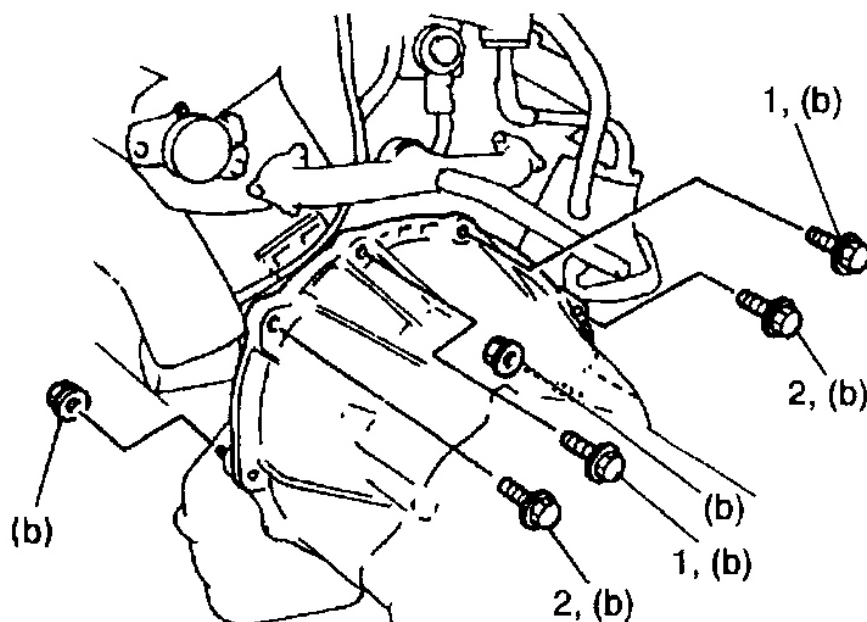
Tightening Engine Side Mounting Bracket Nuts
